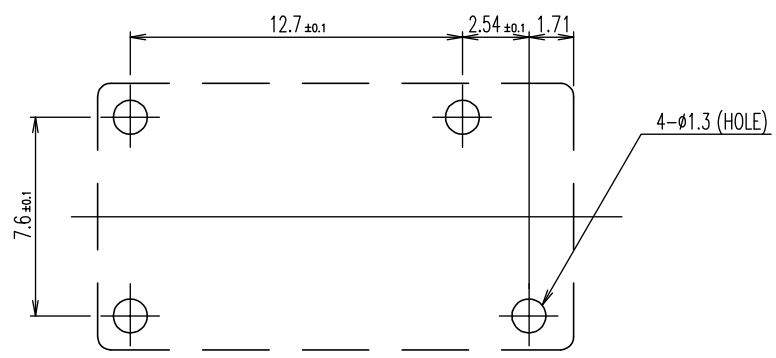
FIGURE FOR PRINTED CIRCUIT BOARD PROCESSING (BOTTOM VIEW)
